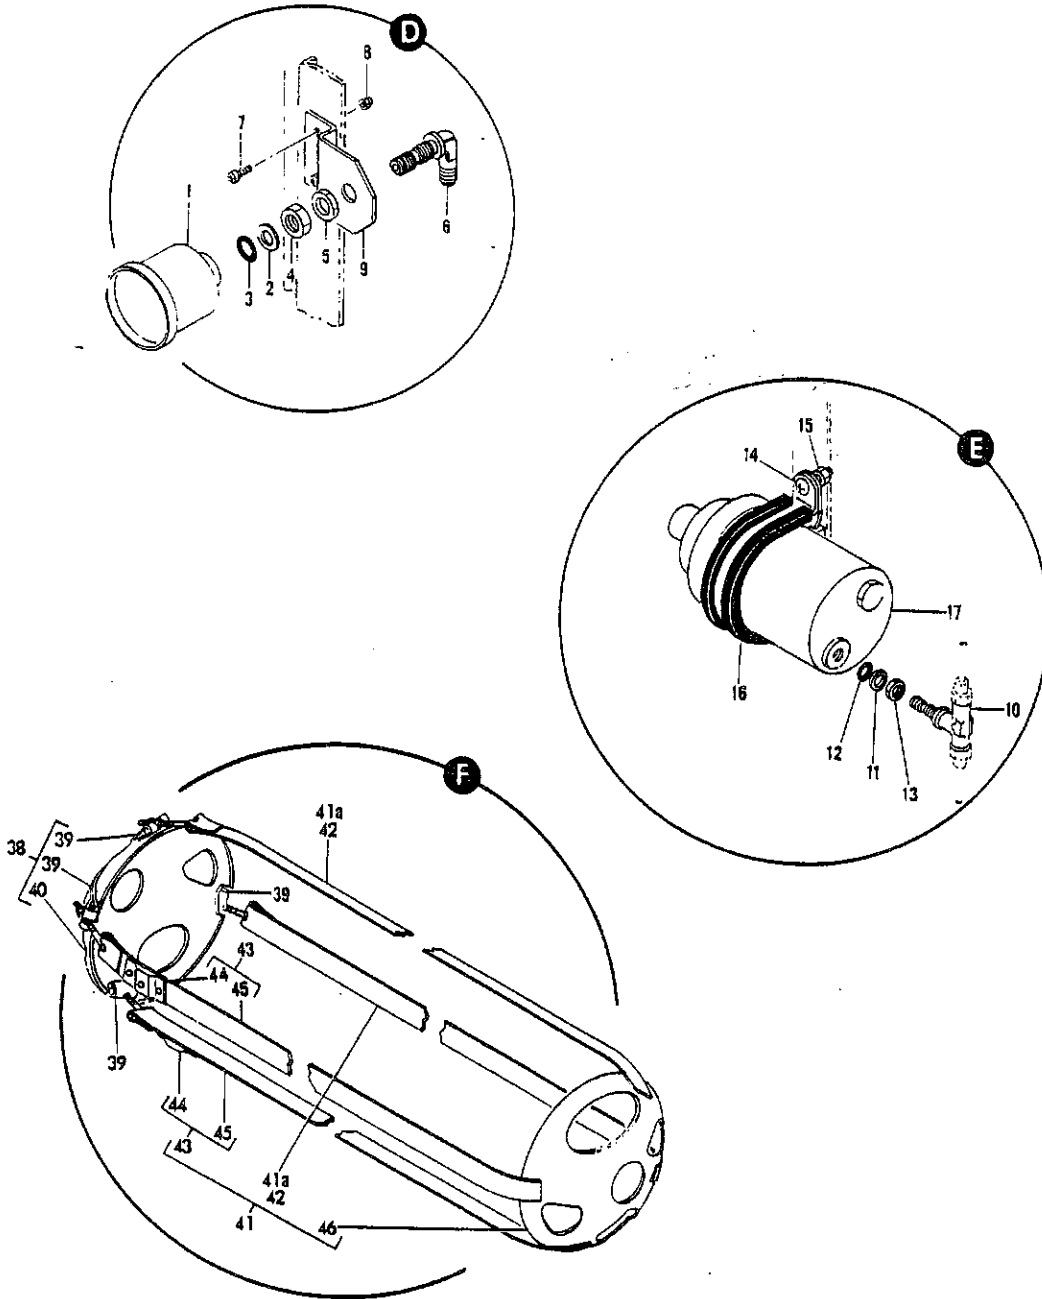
BOTTLE INSTL, ENGINE STARTER AIR (SHEET 2)
